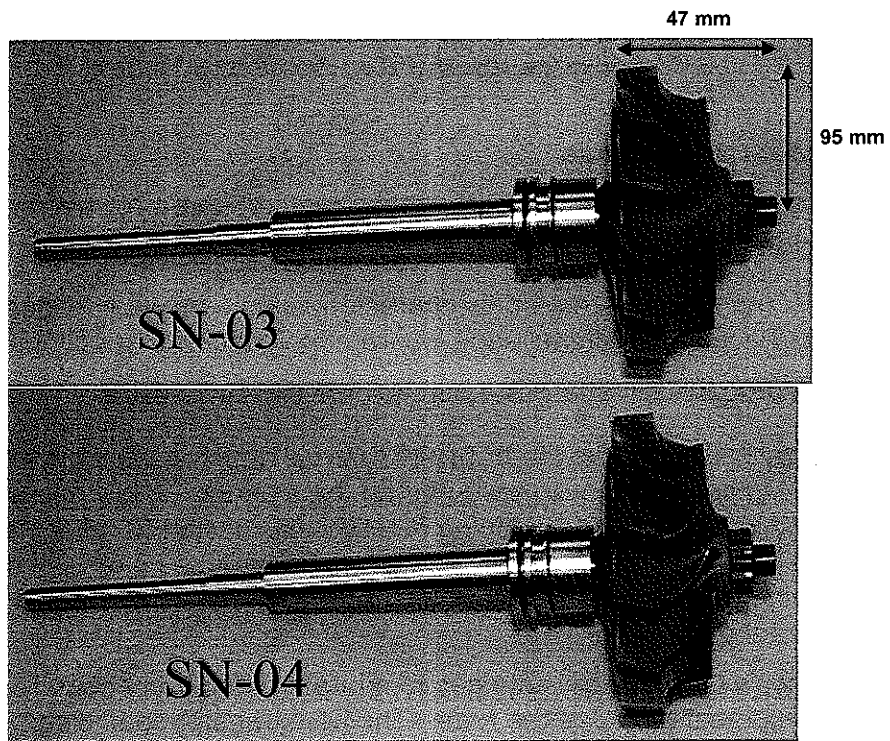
Finished CMT Gas Generator Rotors and Shaft
